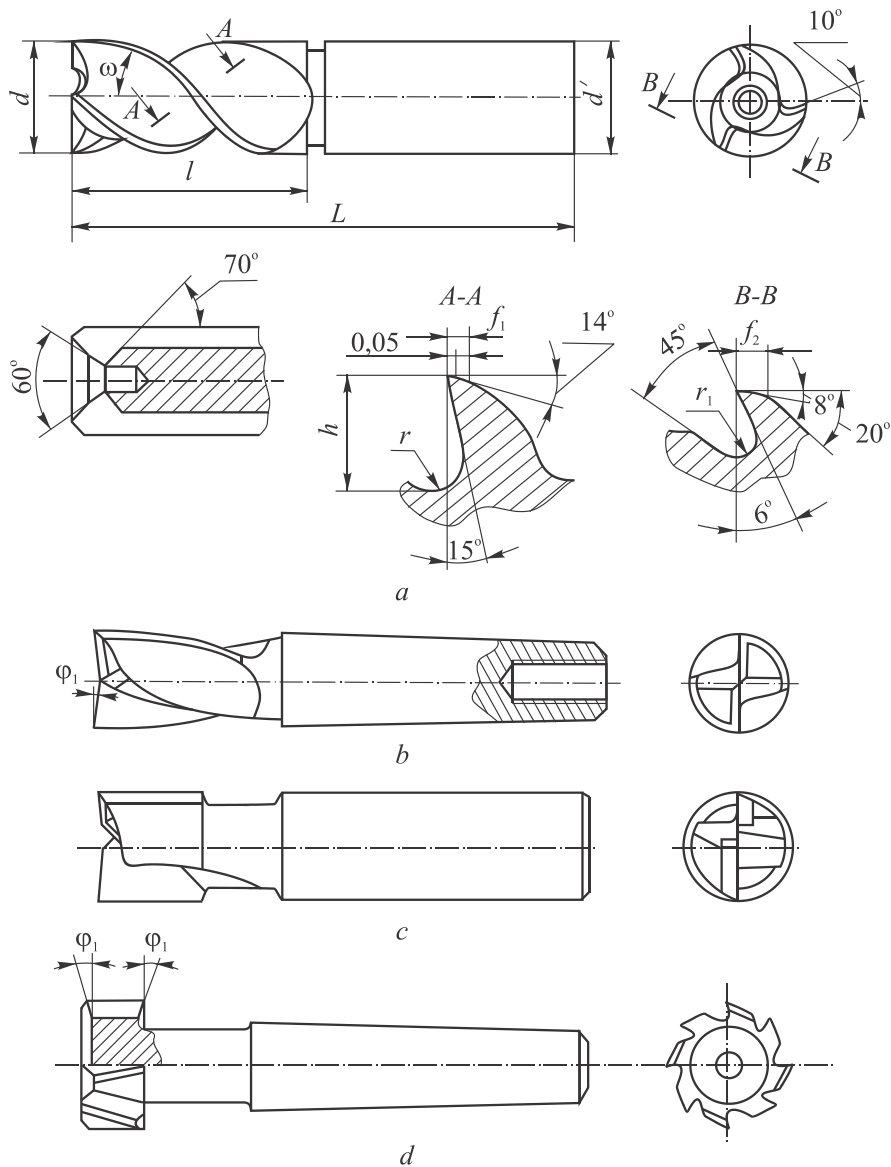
End mills: (a) general purpose end mil; (b) HSS keyway end mill; (c) end mill with brazed carbide inserts; (d) T-slot cutter
